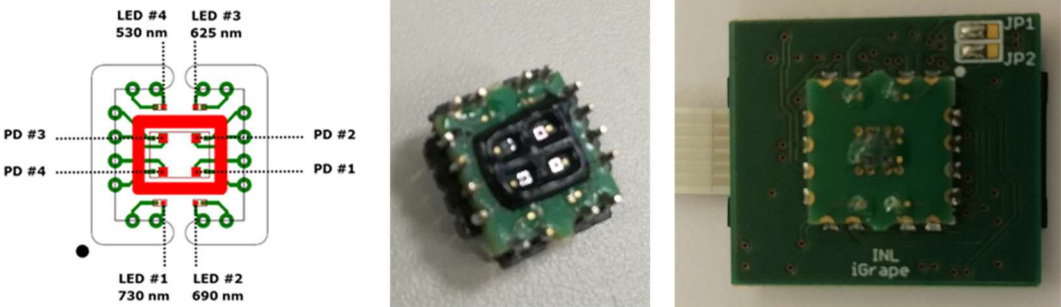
Optical module. Left: PCB layout , Center: optical module assembled with LEDs and Photodiodes/filters, Right: Optical module assembled in host module.
